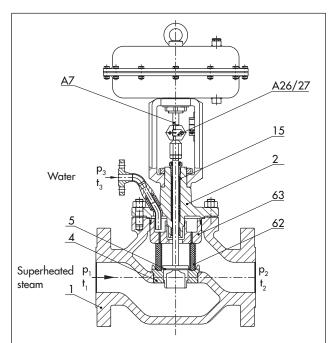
Type 3281-1 Pneumatic Steam Conditioning Valve with flanged connections and Type 3271 Actuator
